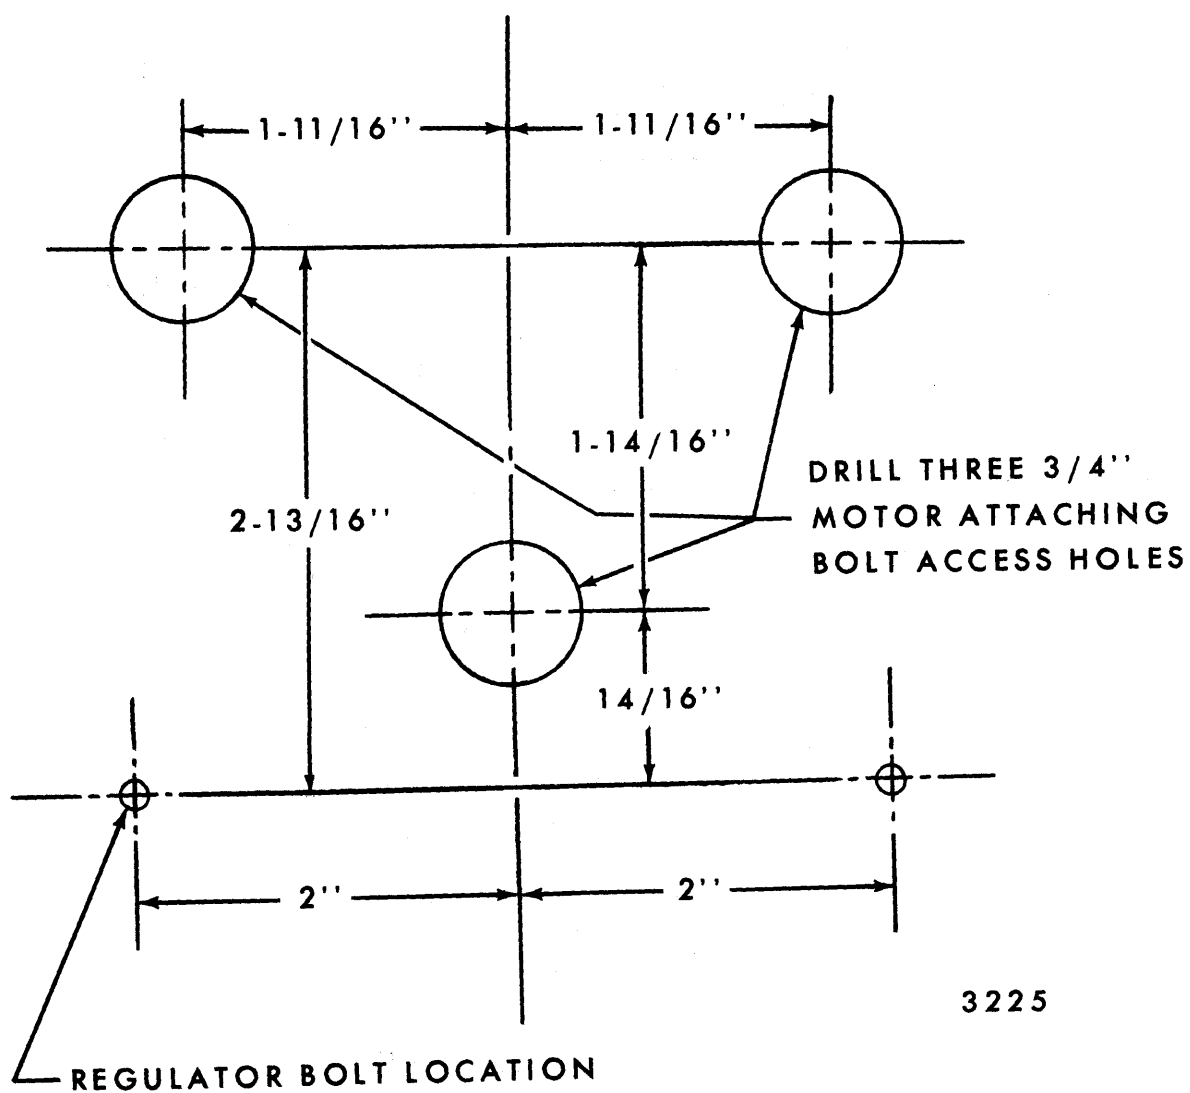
Window Regulator Lower Attaching Bolt Reference Points for Locating Window Motor to Regulator Attaching Bolts - "F" Styles
